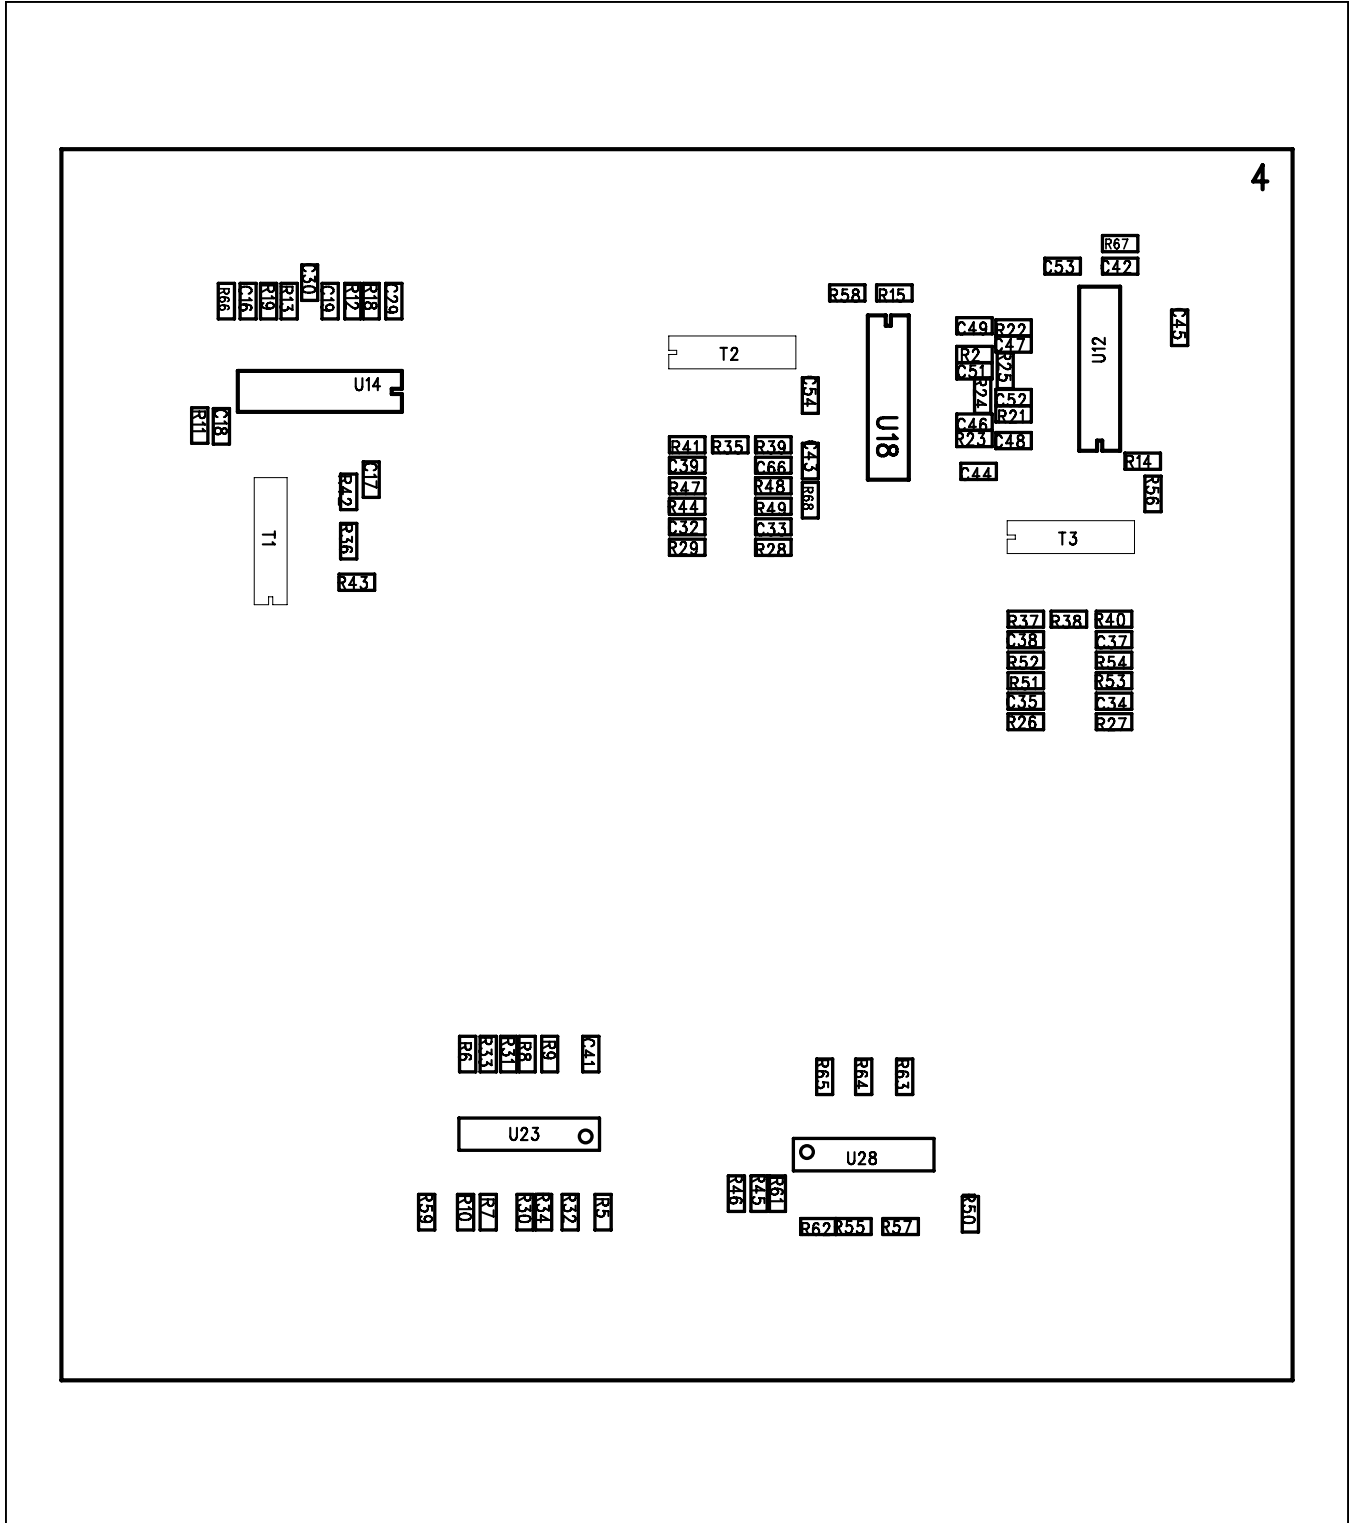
MAX2769/MAX2769B/MAX2769C EV Kit PCB Layout—Bottom Silkscreen
